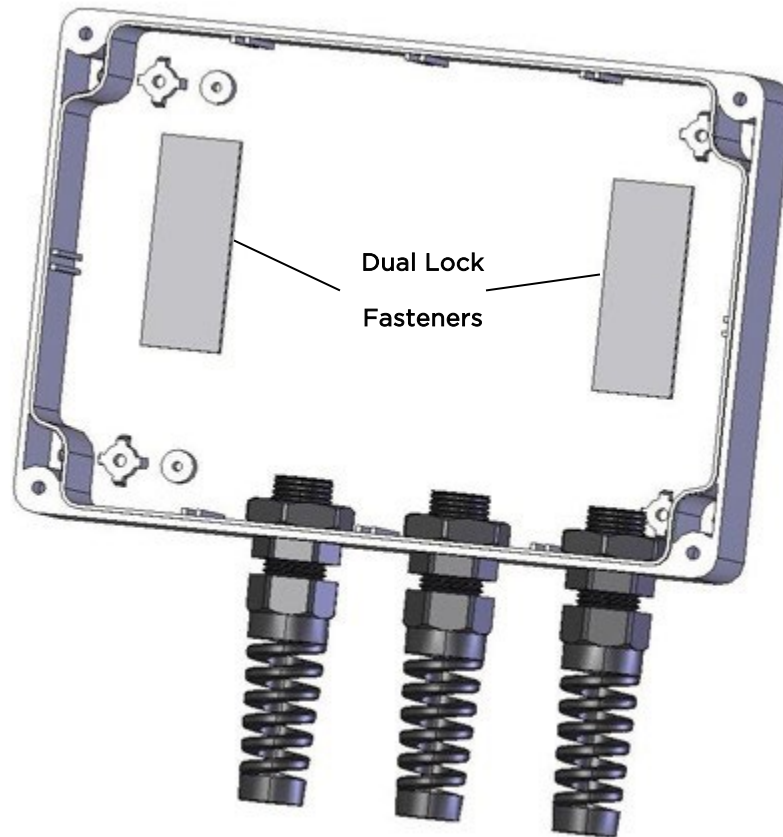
Placement of Dual Lock Fasteners to Mount AIM Module
